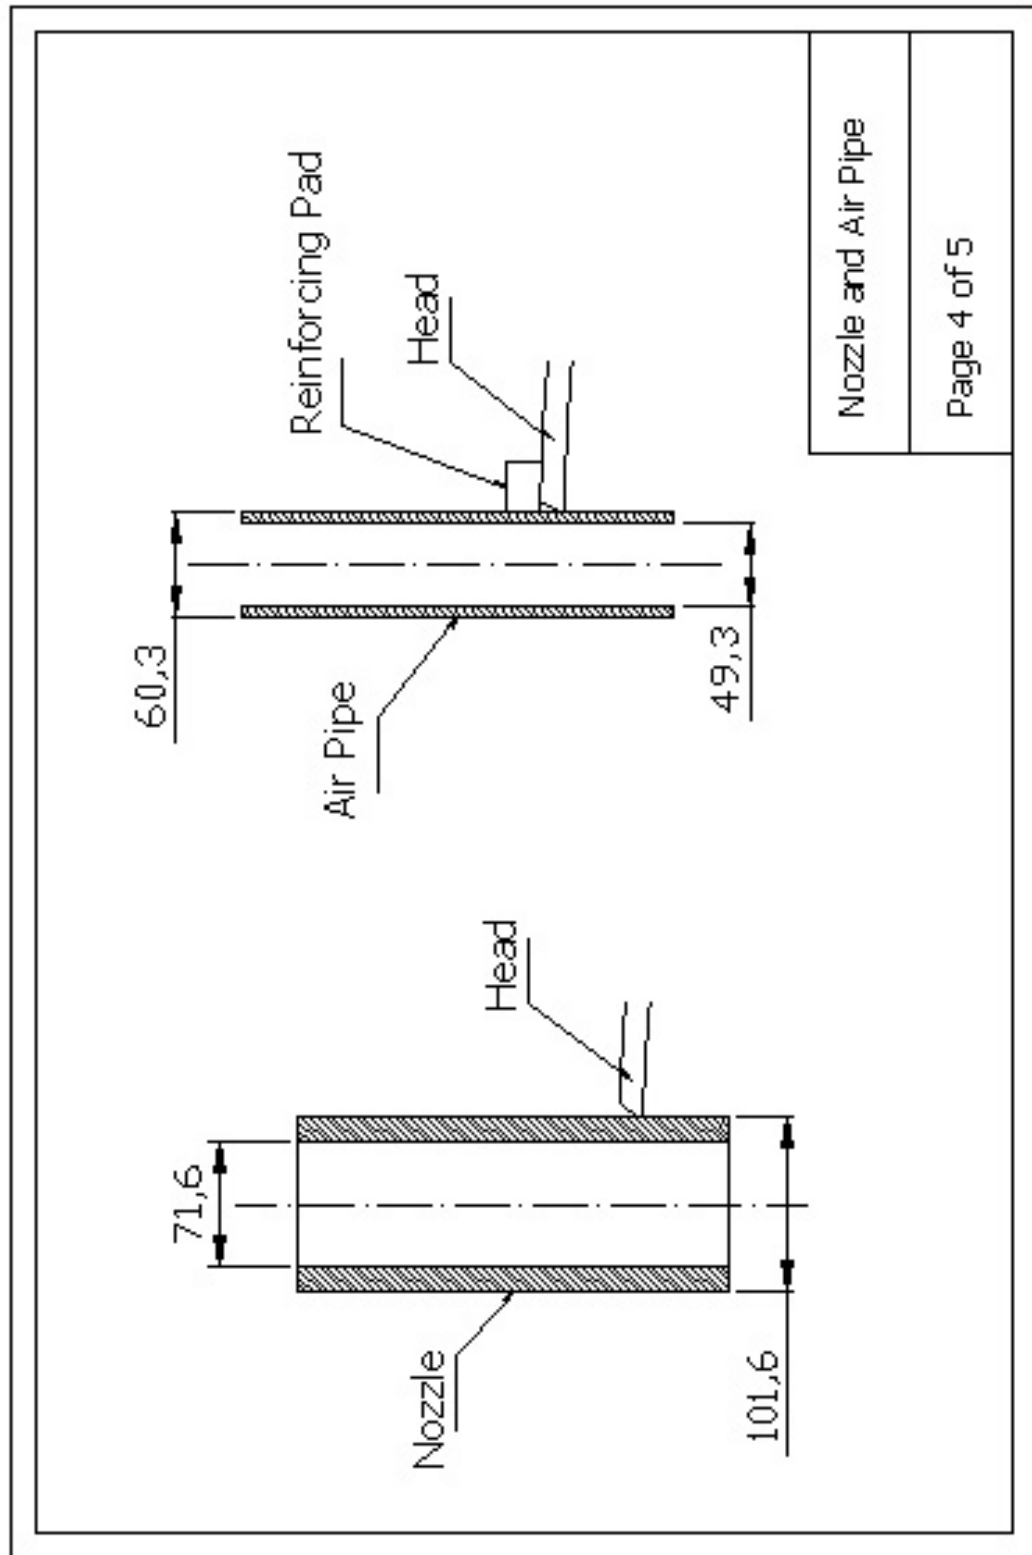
Technical Drawing of Nozzle and Air Pipe
